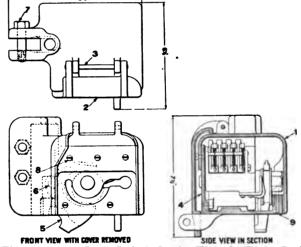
Staff Lever Lock Applied to Saxby & Farmer Interlocking Machine.
